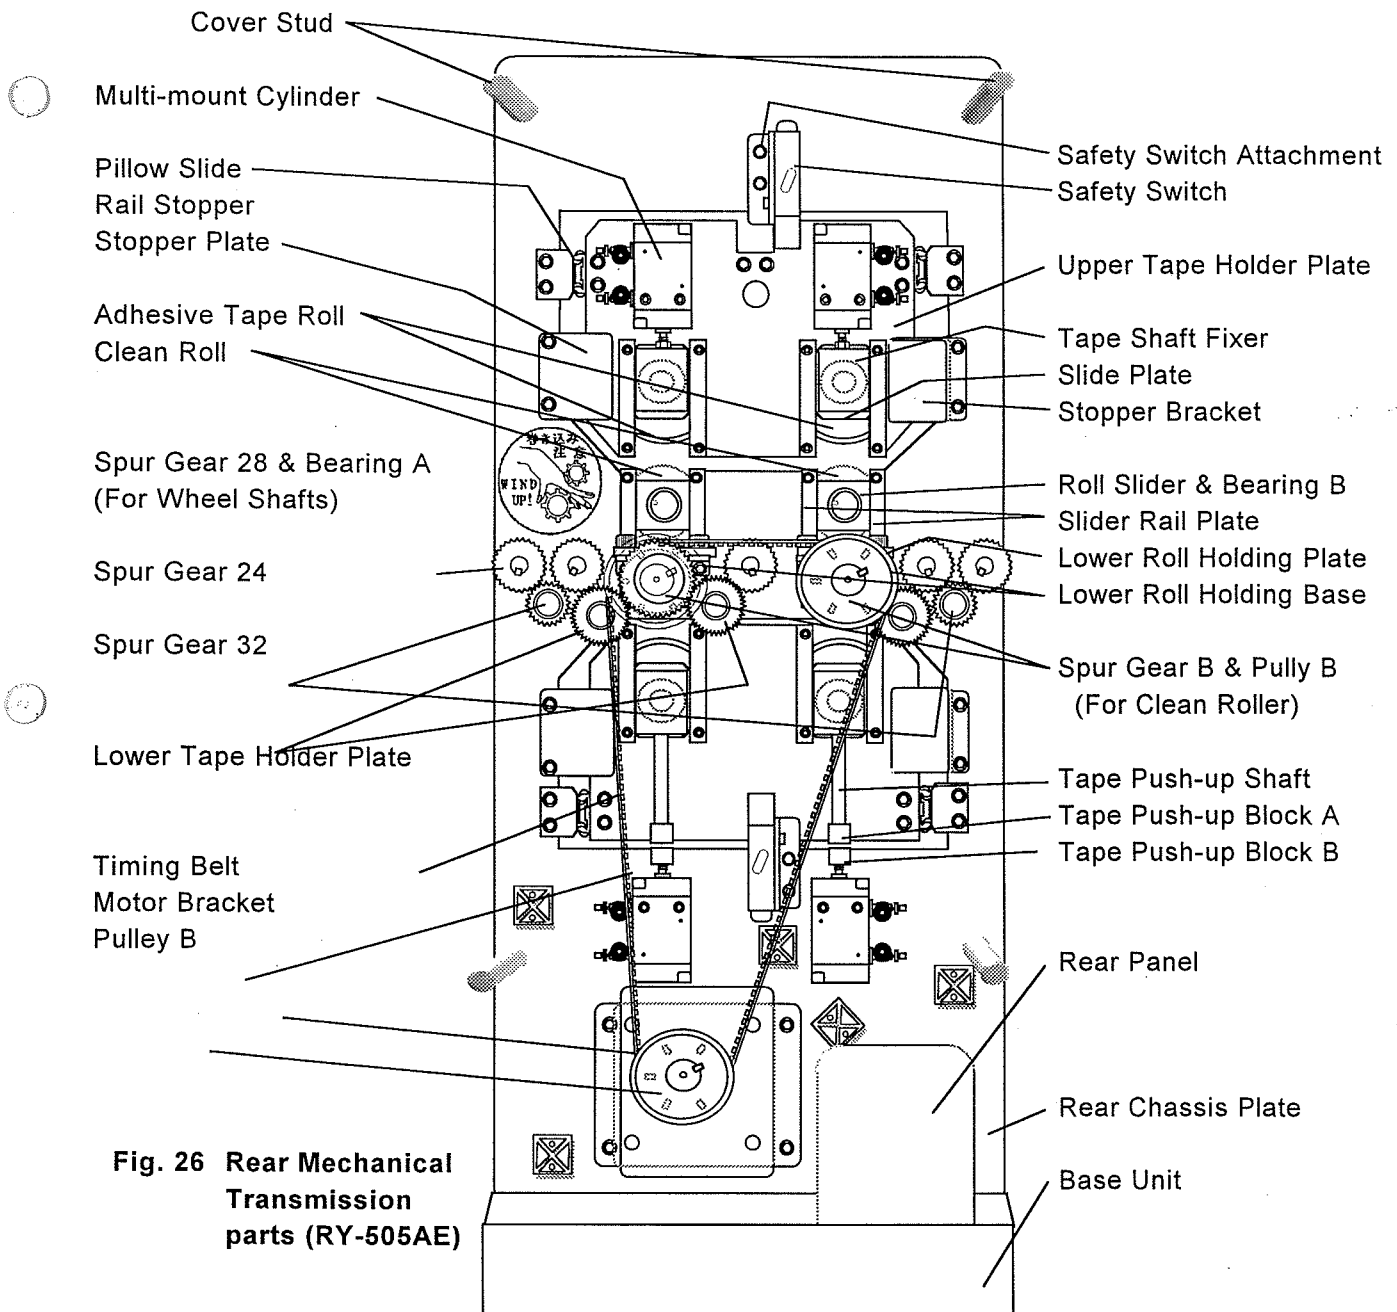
Rear Mechanical Transmission parts (RY-505AE)
